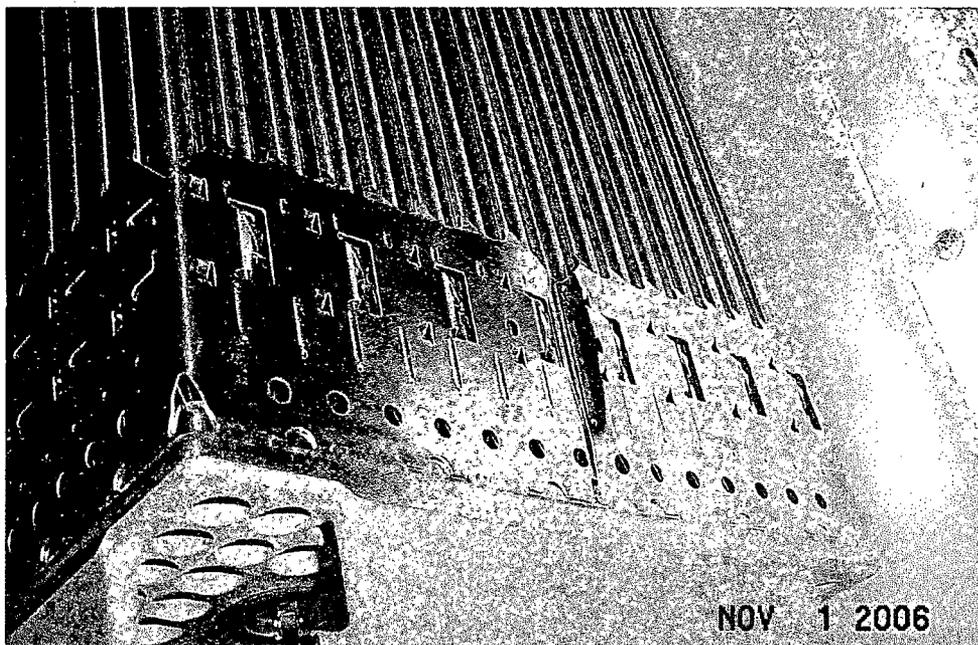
Lower end fitting assembly – guardian grid, low end fitting (Side view A)
